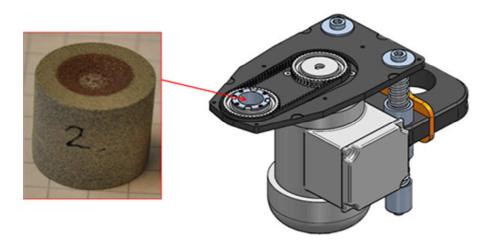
Abrasive dresser subsystem; abrasive insert and technical drawing of the dresser.
